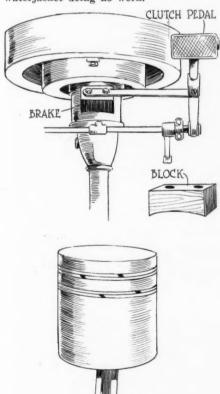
The upper illustration is a simple form of clutch brake which consists of a rod with a wooden block attached operated by the clutch pedal. When the clutch is released the brake is applied. The lower illustration shows the use of two narrow piston rings in one slot instead of one large ring in order to prevent oil and gas leakage. This appears to have some merits
